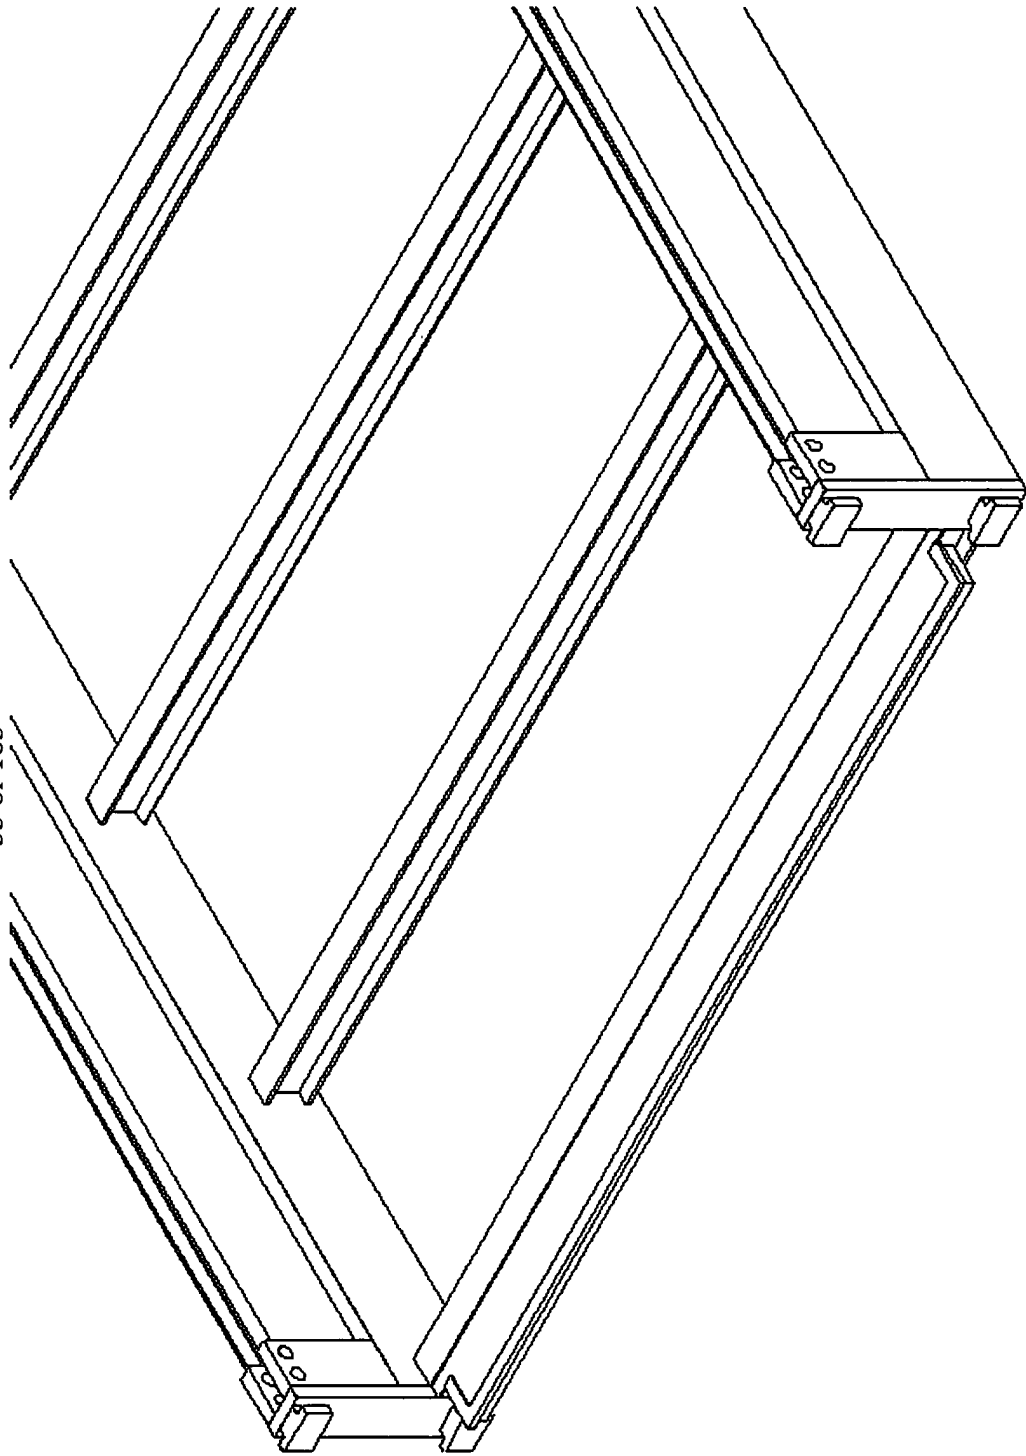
B: Isometric view of the right end of a floor frame (40 foot high cube collapsible cargo container)
